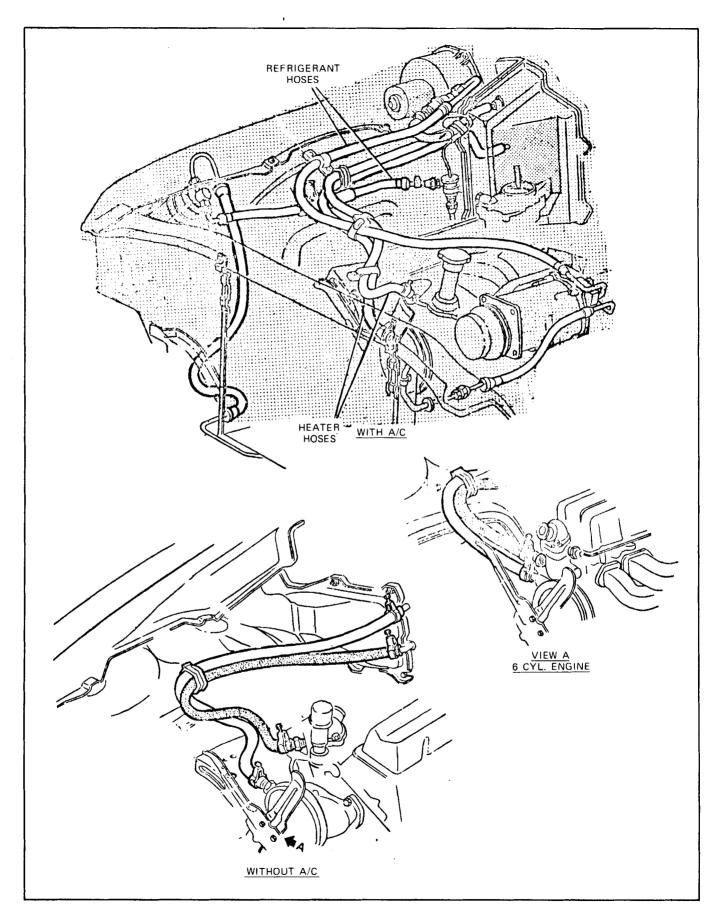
Heater Hose Routing - X Series (307 Engine)
